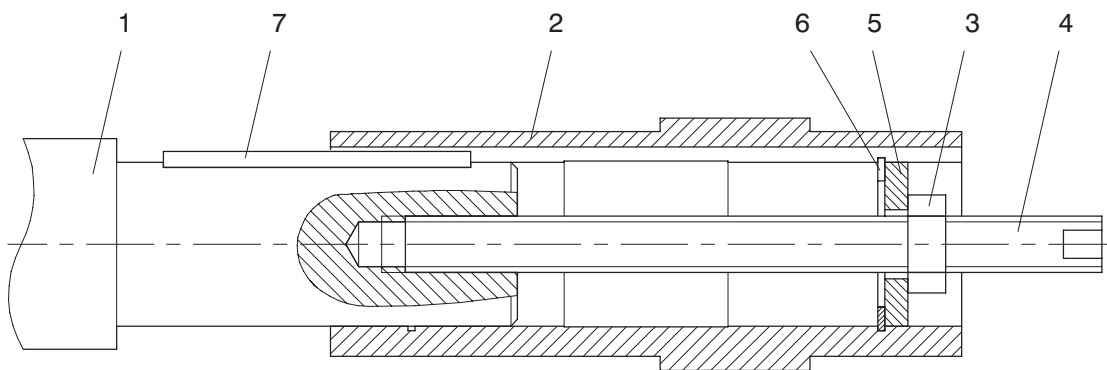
Mounting hollow shaft and parallel key
